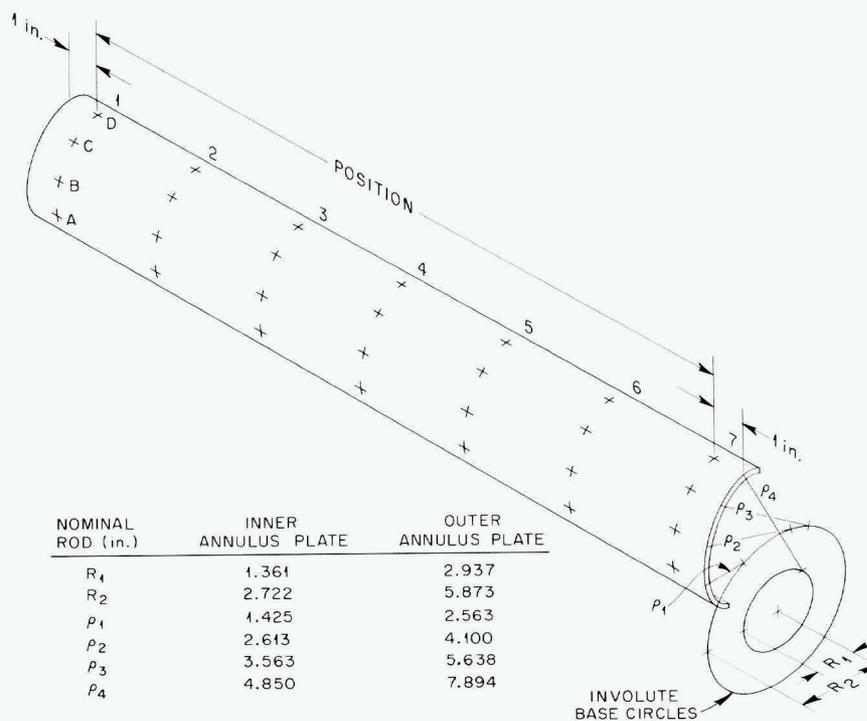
Location Pattern Used in Inspecting HFIR Fuel Plates for Uniformity and Reproducibility of Involute Shape.
